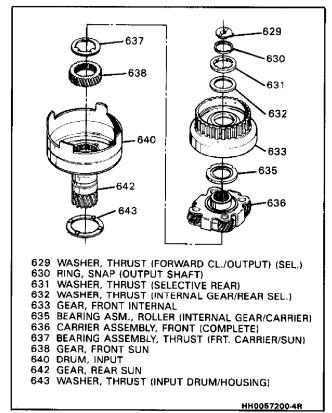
Removing Front Internal Gear, Carrier and Input Drum
